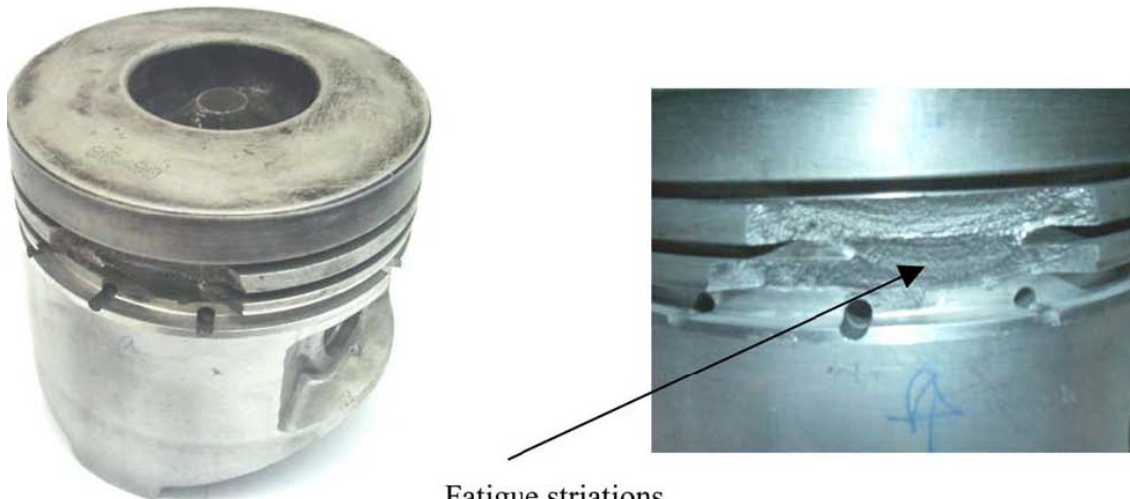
Engine piston with damaged grooves: (a) piston; (b) detail of damaged grooves.
